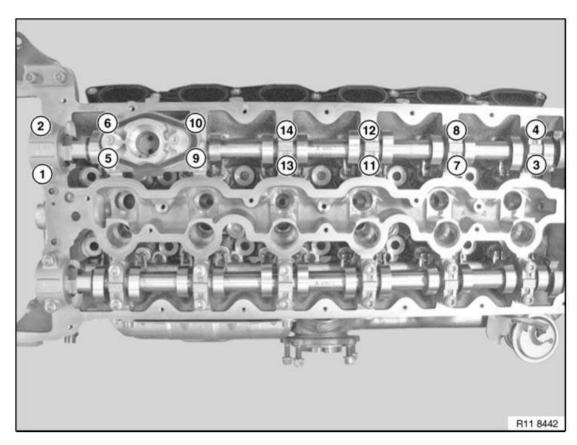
Identifying Camshaft Bearings Bolts Releasing Sequence Courtesy of BMW OF NORTH AMERICA, INC.
